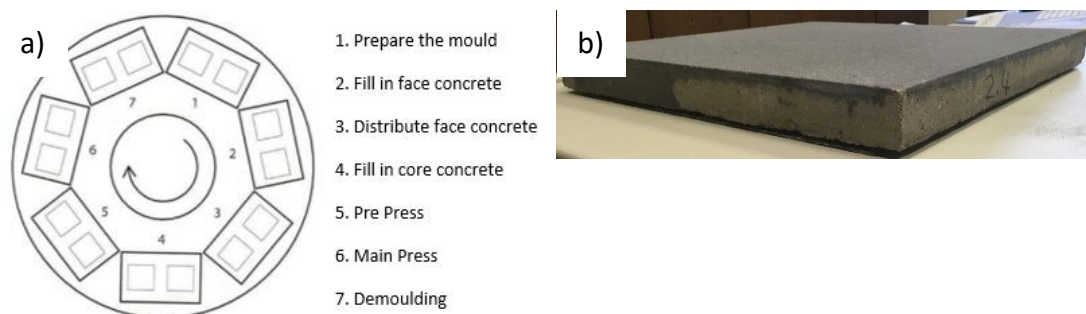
Two layered concrete paving slab process, with a) seven steps of the process and b) picture of the AAM-paving slab
